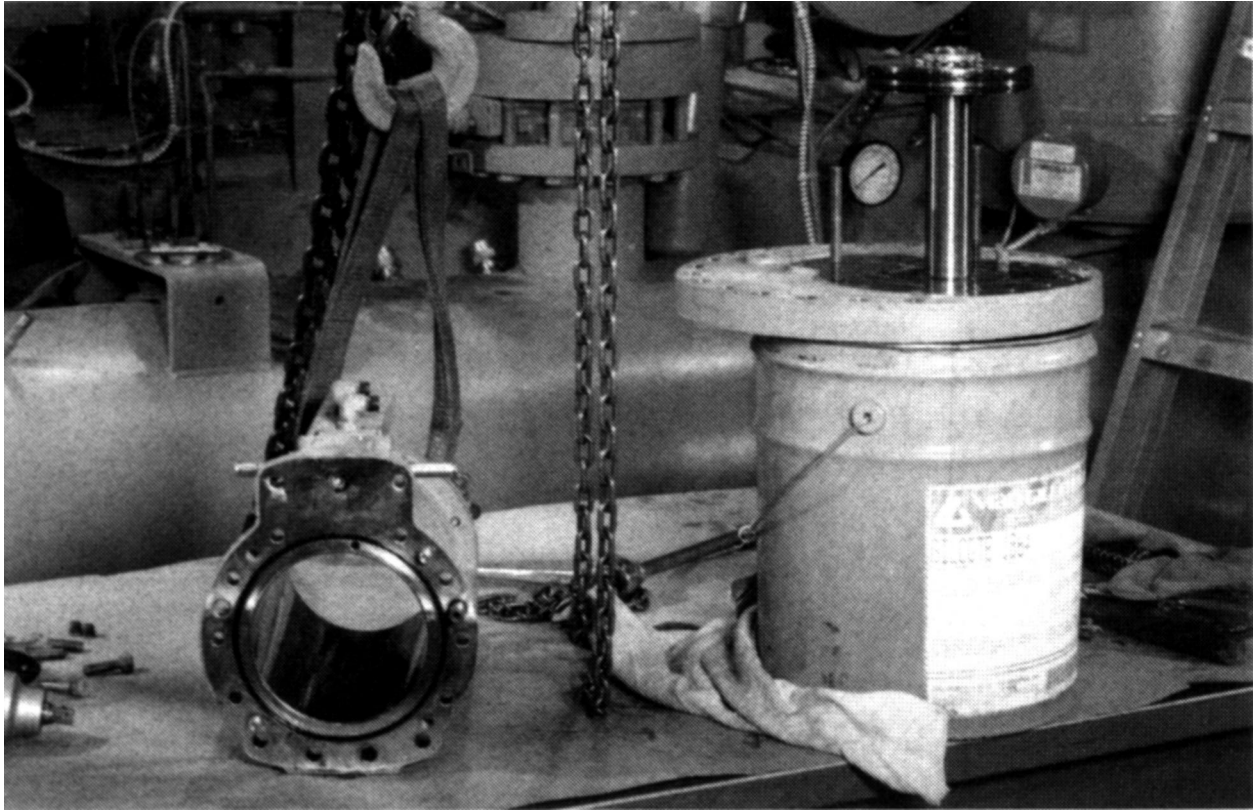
Removing Female Inlet Case Bearing Sleeve
